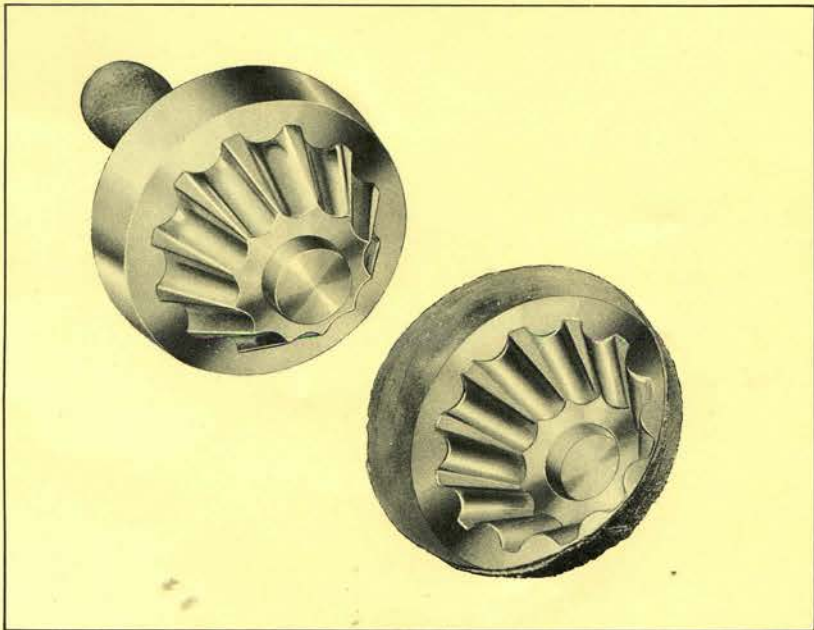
Metal master pattern and Cerrotru dip-cast mould produced thereon.
